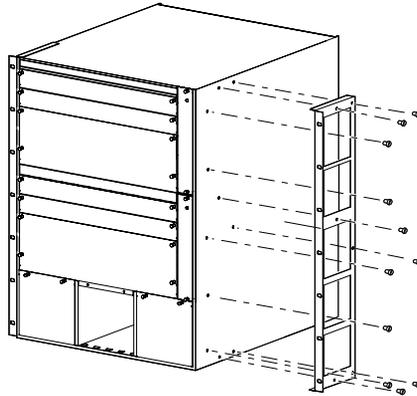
Positioning the rack-mounting brackets: 8006 Chassis
